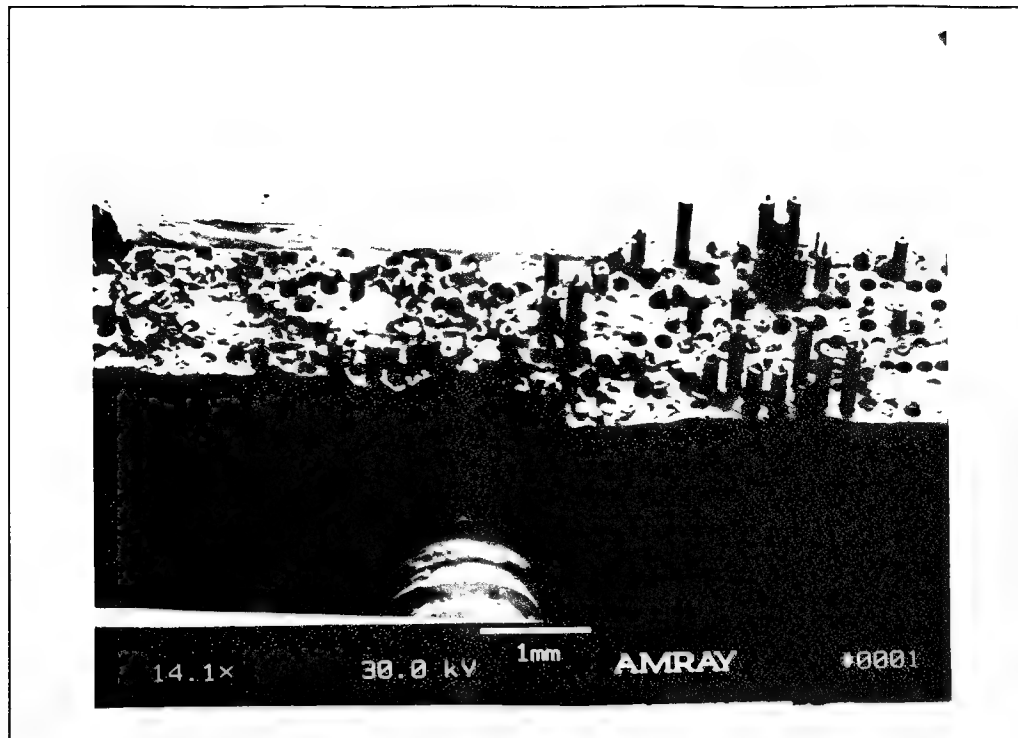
Fracture Surface at 625 MPa, TC HT
